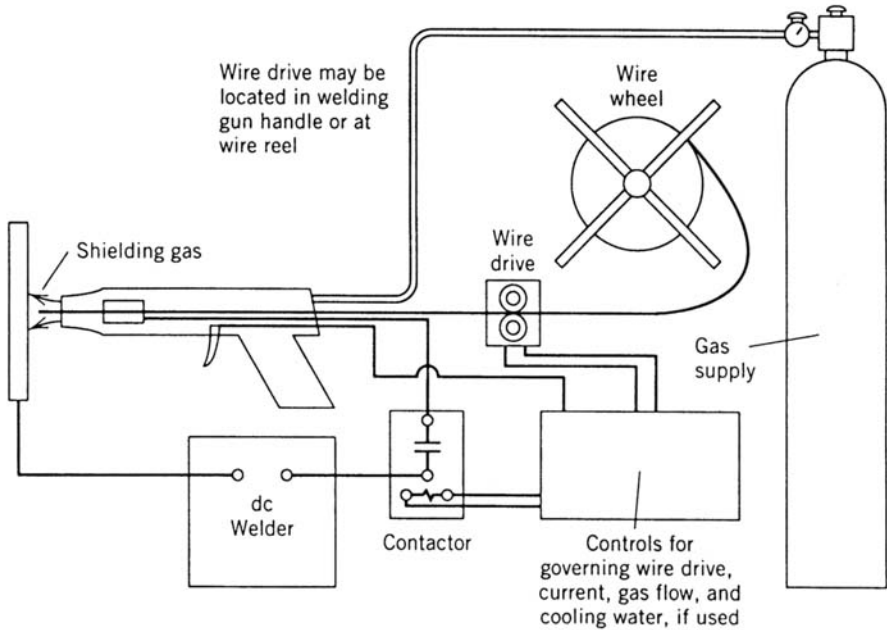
Equipment for gas metal arc welding (GMA).
